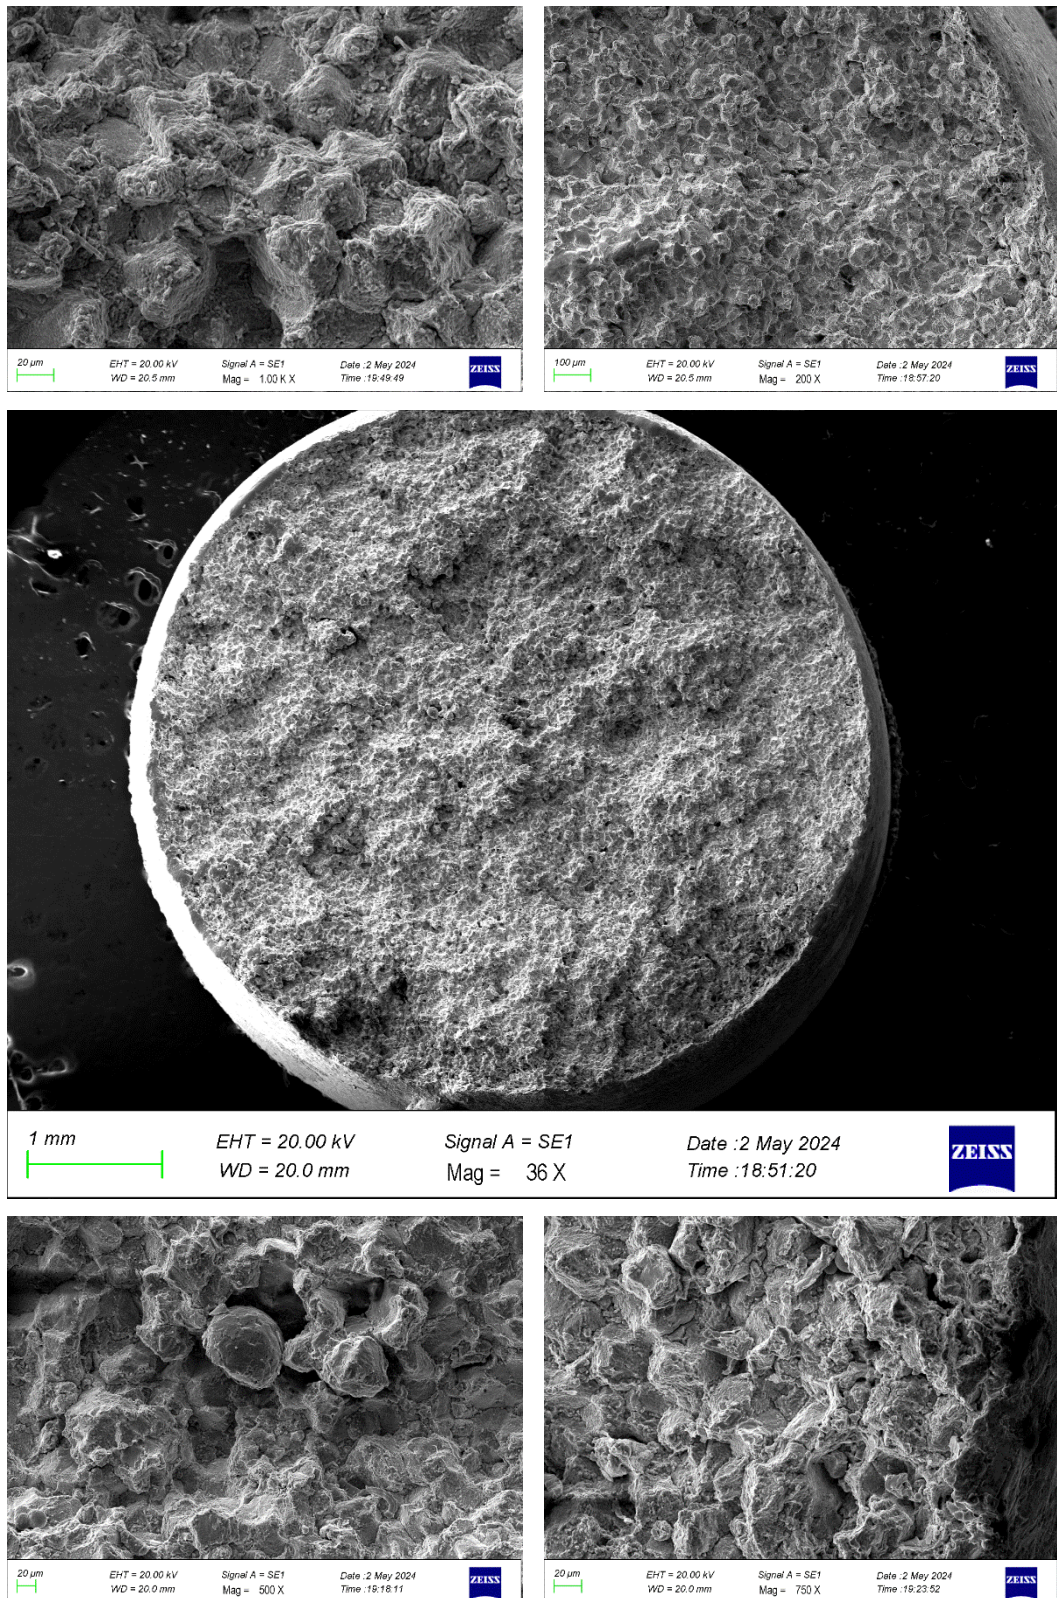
Fracture morphology under SEM after hot tensile test at 1163°C
